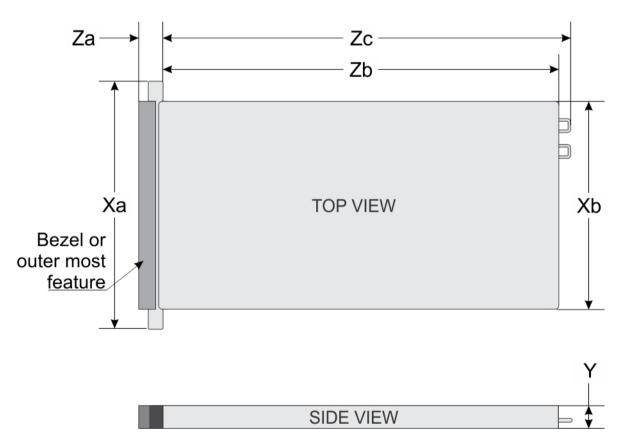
Details the dimensions of Dell PowerEdge C4130 system
